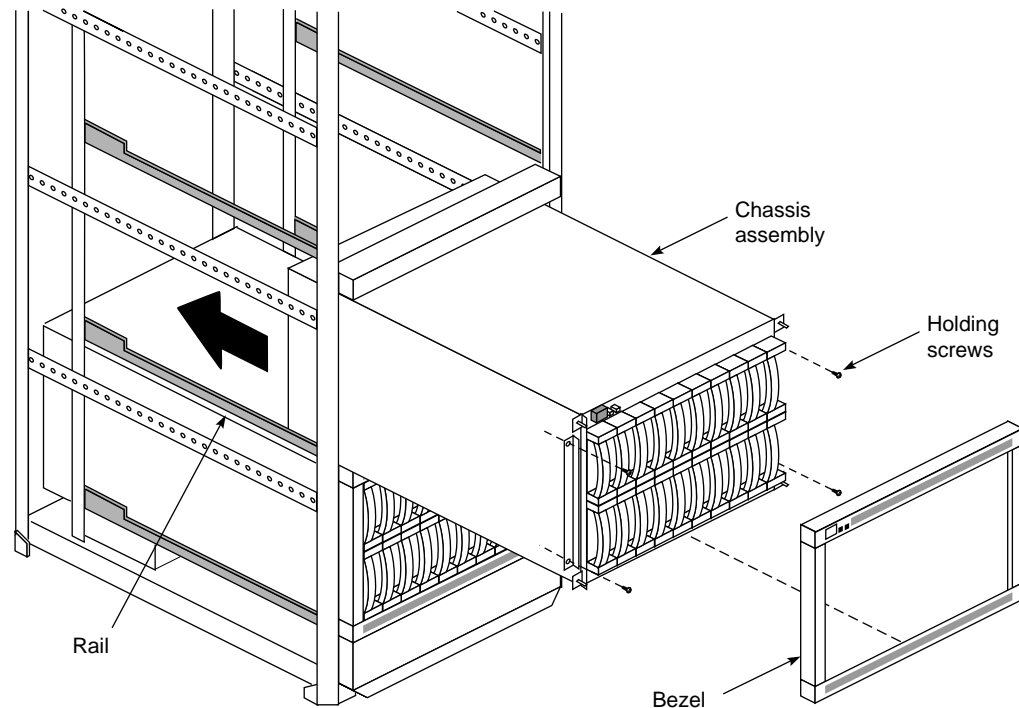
Installing an Additional Chassis Assembly in the Challenge RAID Rack
